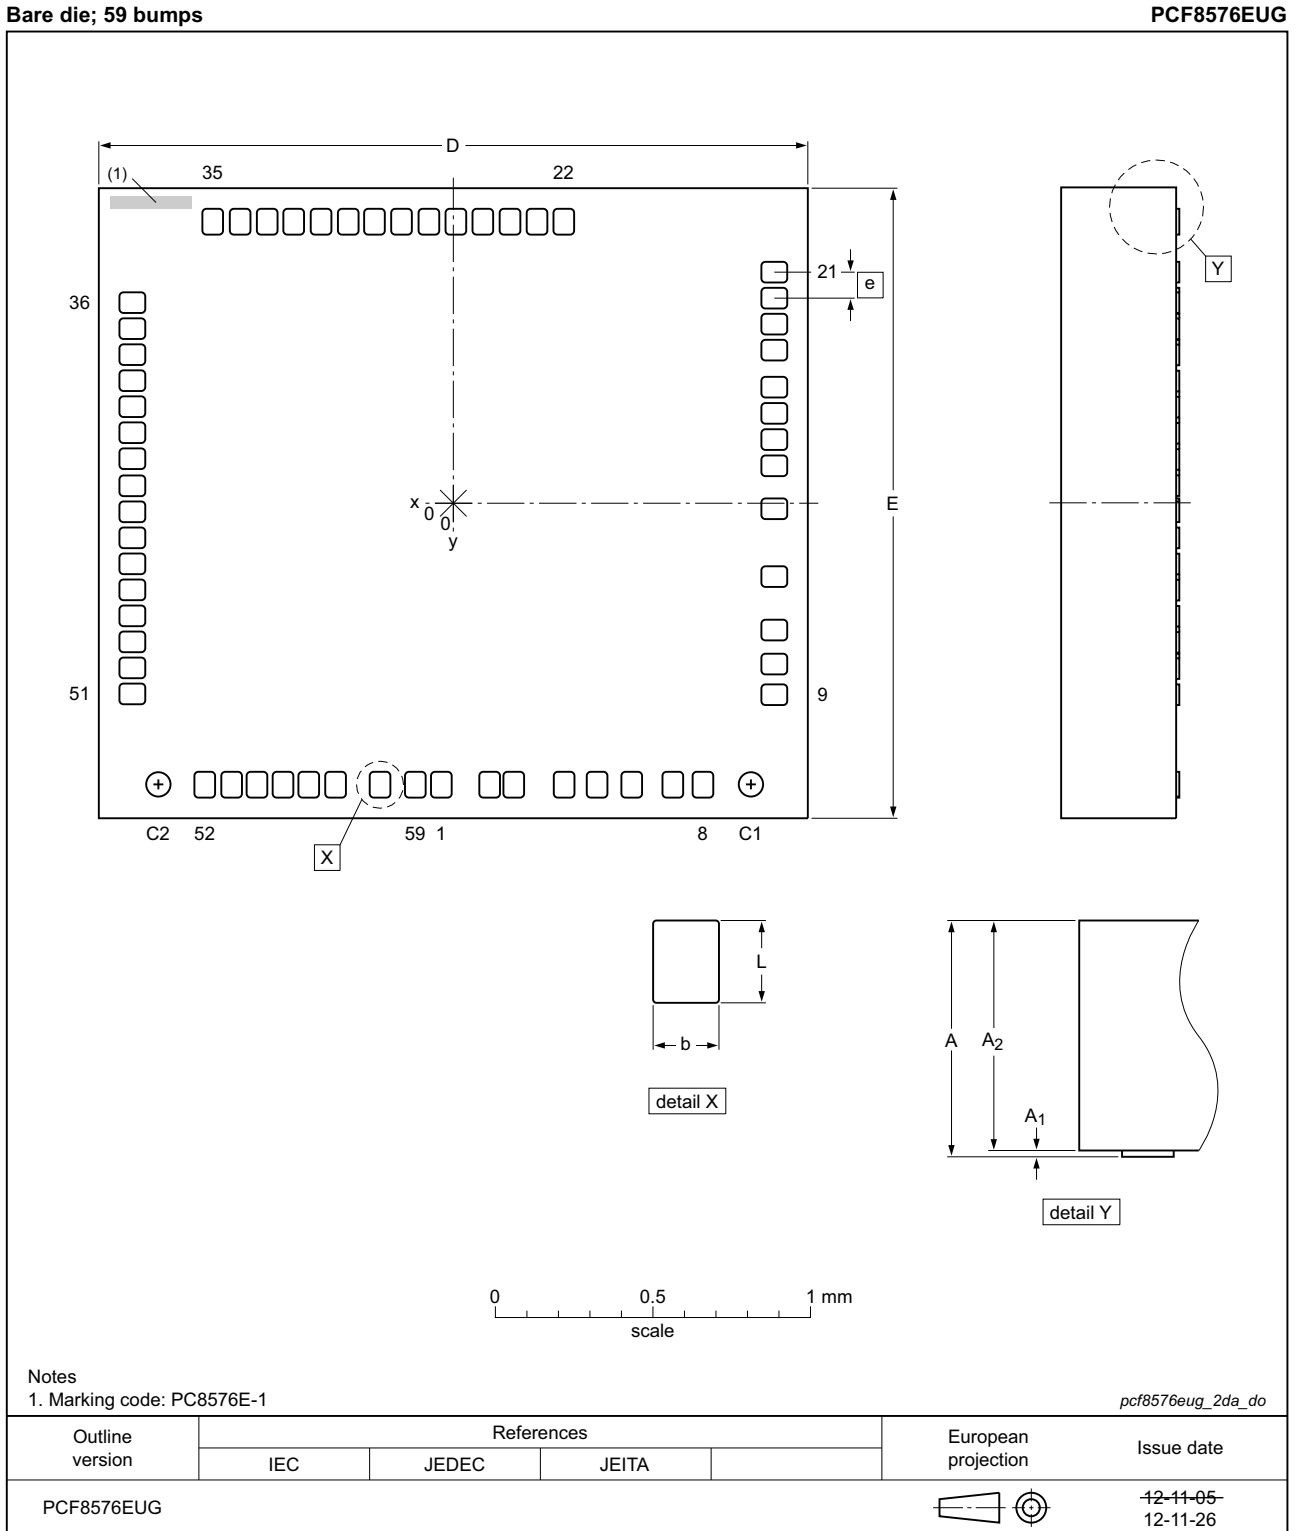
Bare die outline PCF8576EUG (for dimensions see Table 23)
